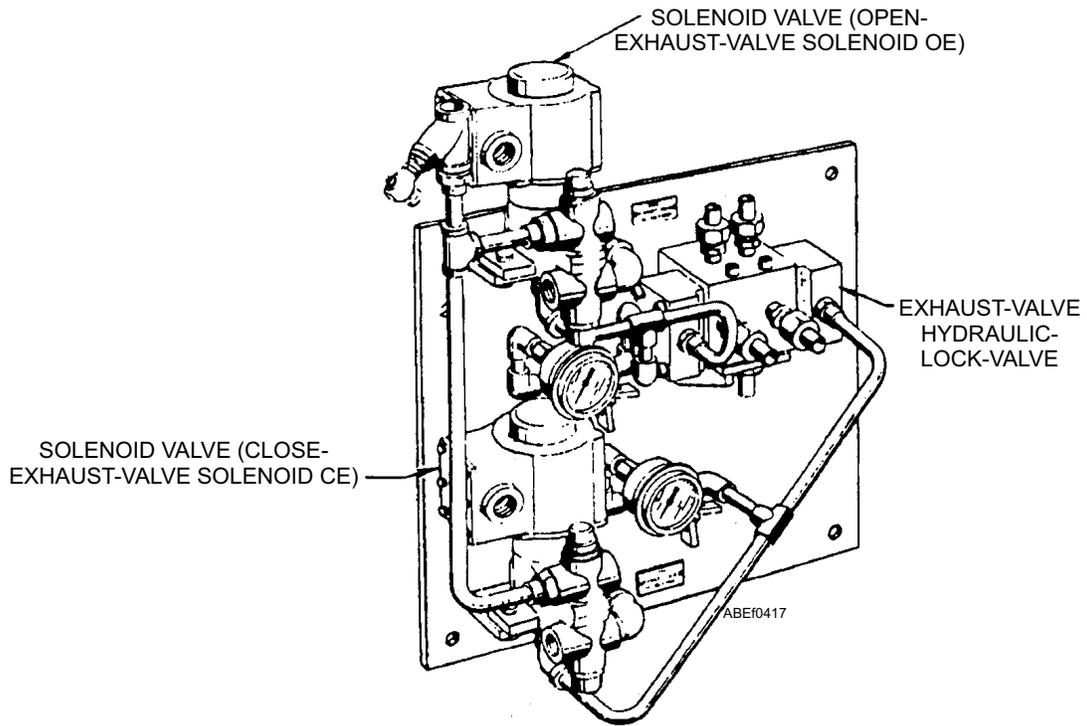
Exhaust-valve hydraulic-lock-valve panel.
